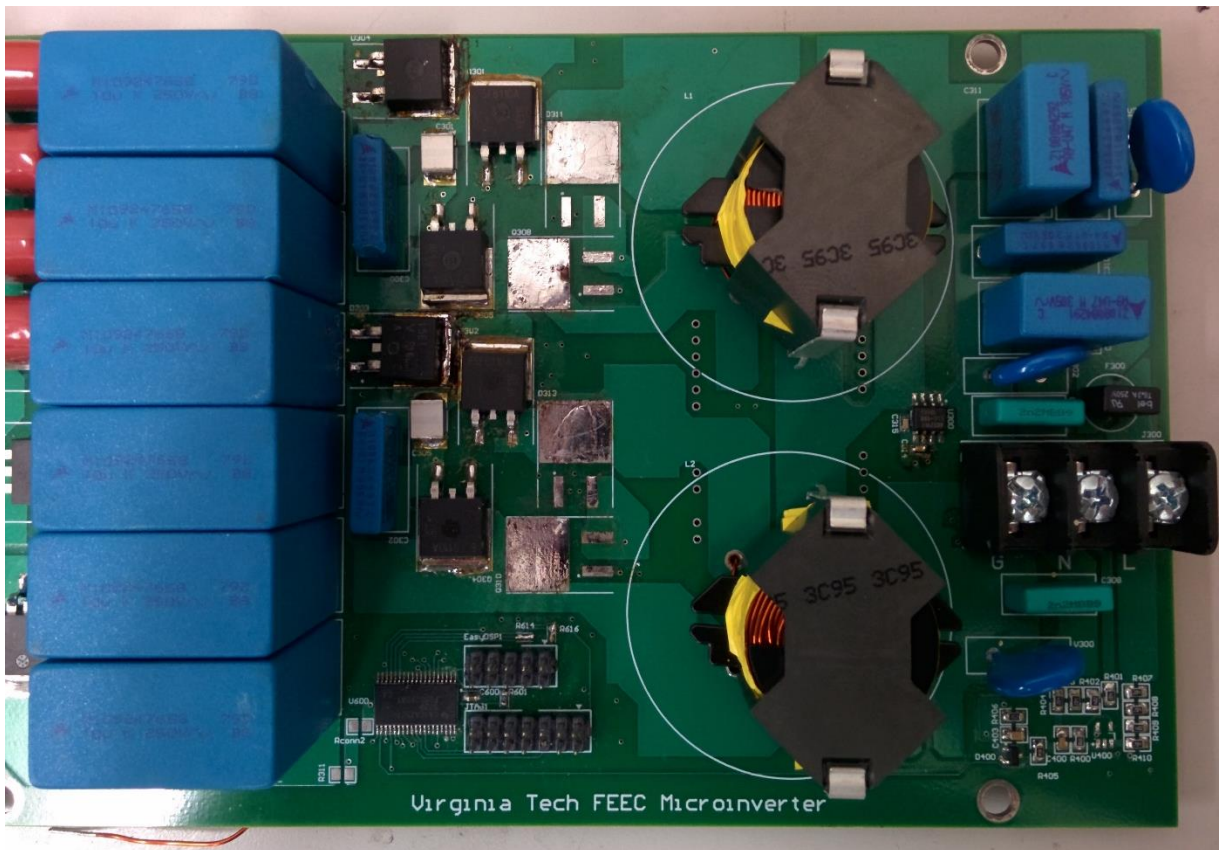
Unipolar Dual Buck Inverter Test PCB
